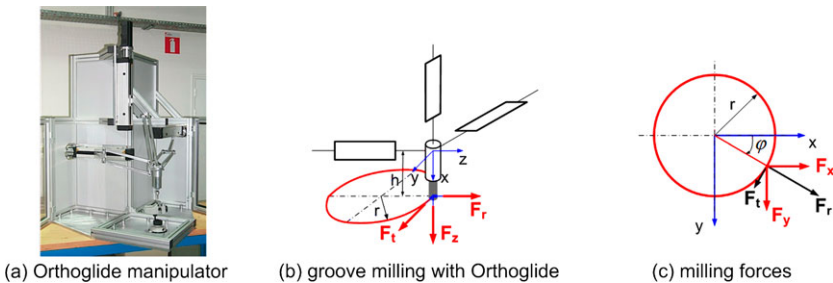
Milling forces and trajectory location for groove milling using Orthoglide manipulator.
